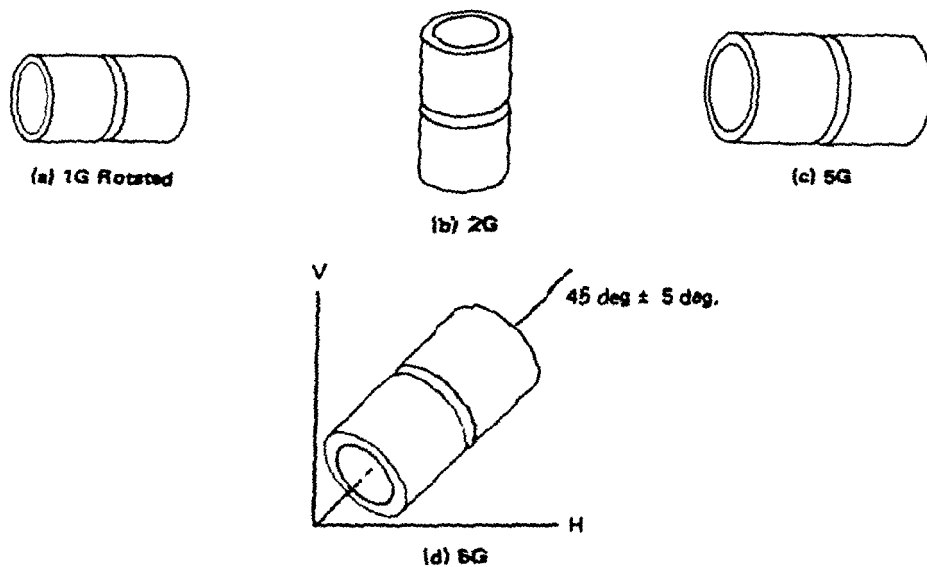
Groove Welds in Pipe, Test Positions
